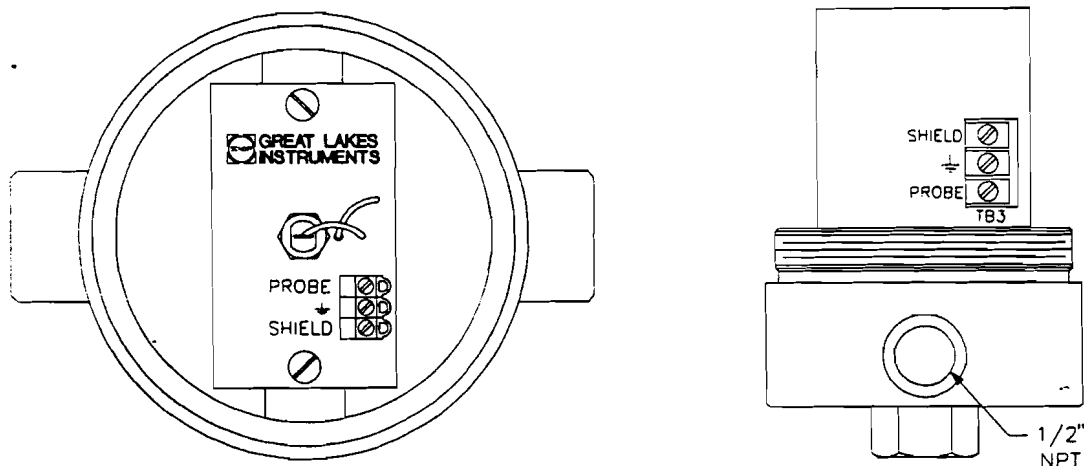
Triaxial Cable Hook-up Between Level Probe J-Box And Remote-Mounted Model 699L
